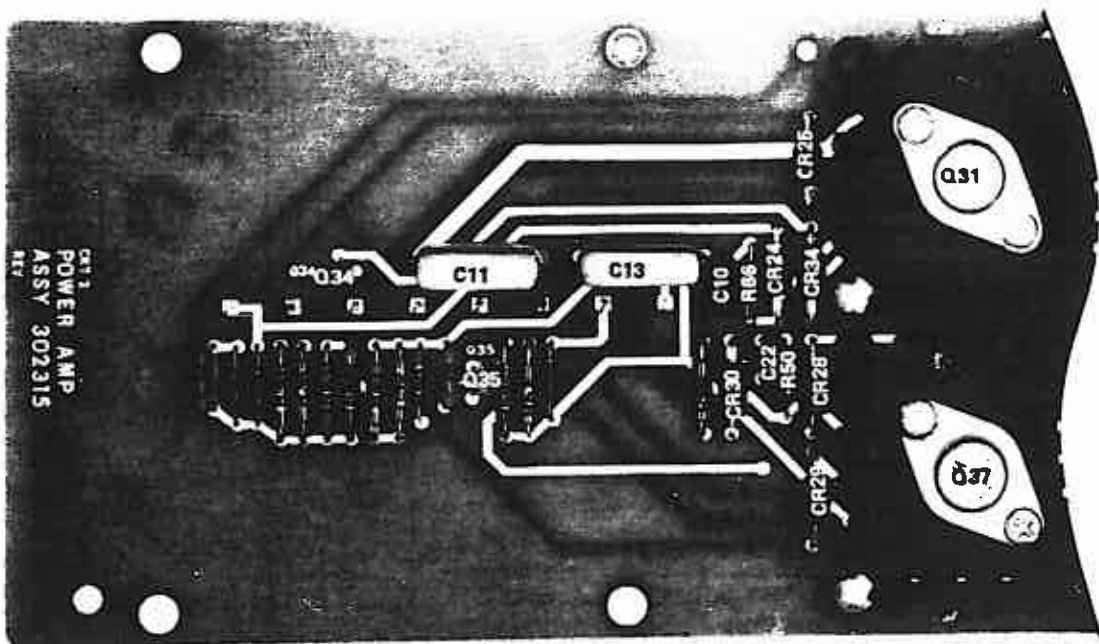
POWER AMPLIFIER PCB ASSEMBLY (Sheet 1 of 2)
